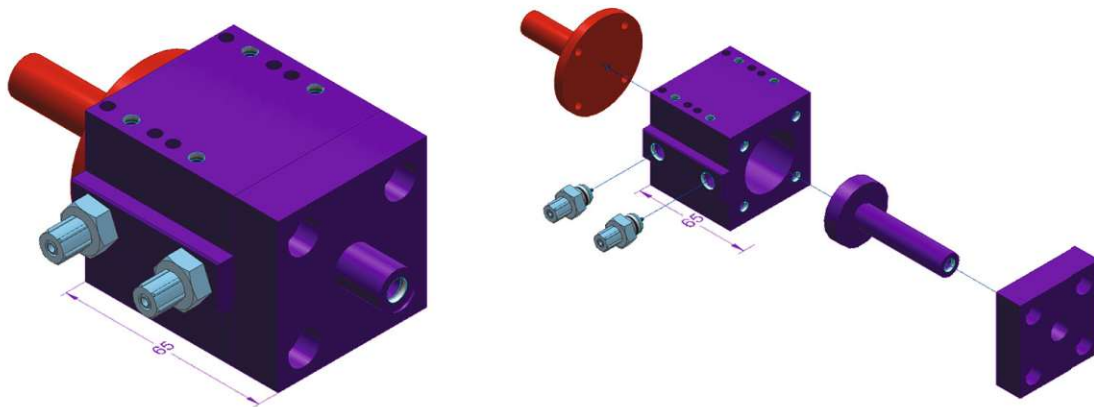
CAD render of the HM pneumatic piston with a measurement in mm for scale. Colored in dark blue are the piston chamber, lid, and shaft. Colored light blue is the air vents, and red is the supporting shaft. It can be viewed assembled on the left side as a whole and on the right as an explosion view to better illustrate the connections and inner parts.
